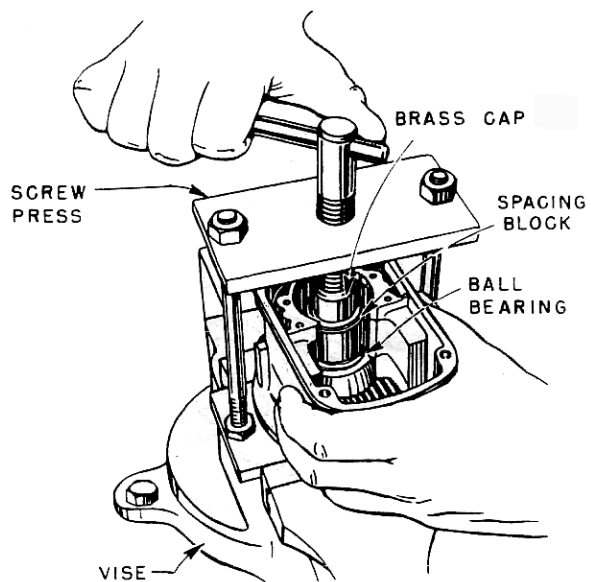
Pressing Rotor Drive End Bearing into Housing
